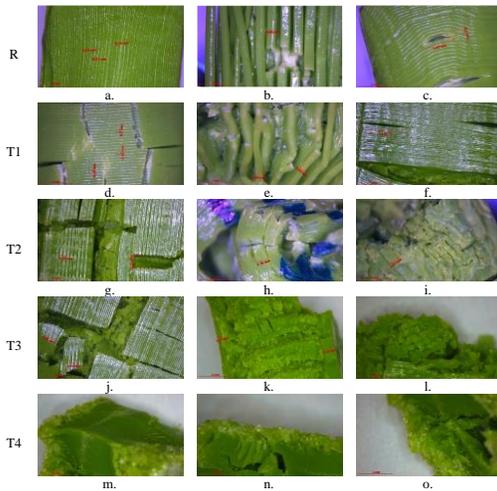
The appearance of the fracture surfaces for the thermally processed samples (3h time)
